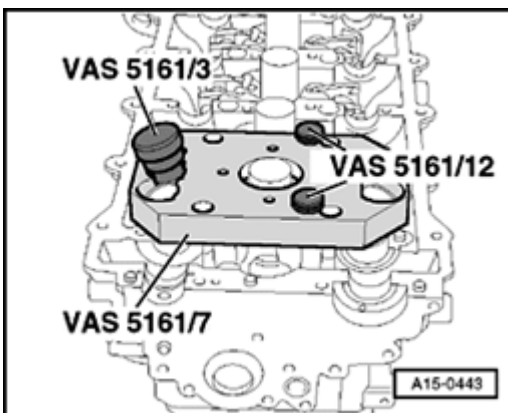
Placing Guide Plate VAS 5161/7 From Valve Cotter Disassembly, Assembly Device VAS 5161 On Cylinder Head & Securing Guide Plate VAS 5161/7 With Knurled Screws VAS 5161/12
